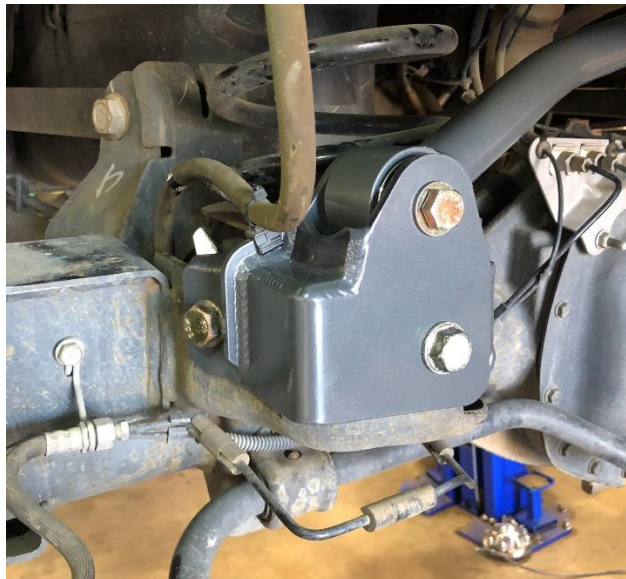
Fixed Side of the Adjustable Rear Track Bar Bolted into relocation Bracket.
